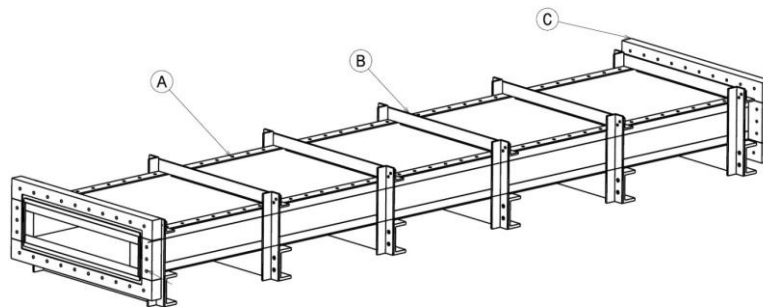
Single panel of the test section (a) Perspex channel (b) Supporting fixtures (c) Flanges.
